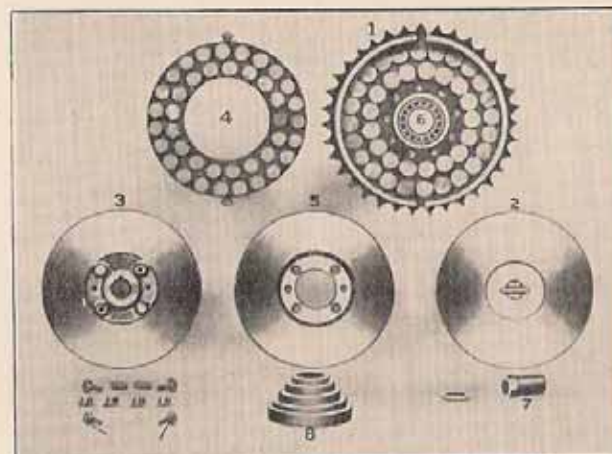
THE 7-99 H.P. A.J.S. CLUTCH PARTS
